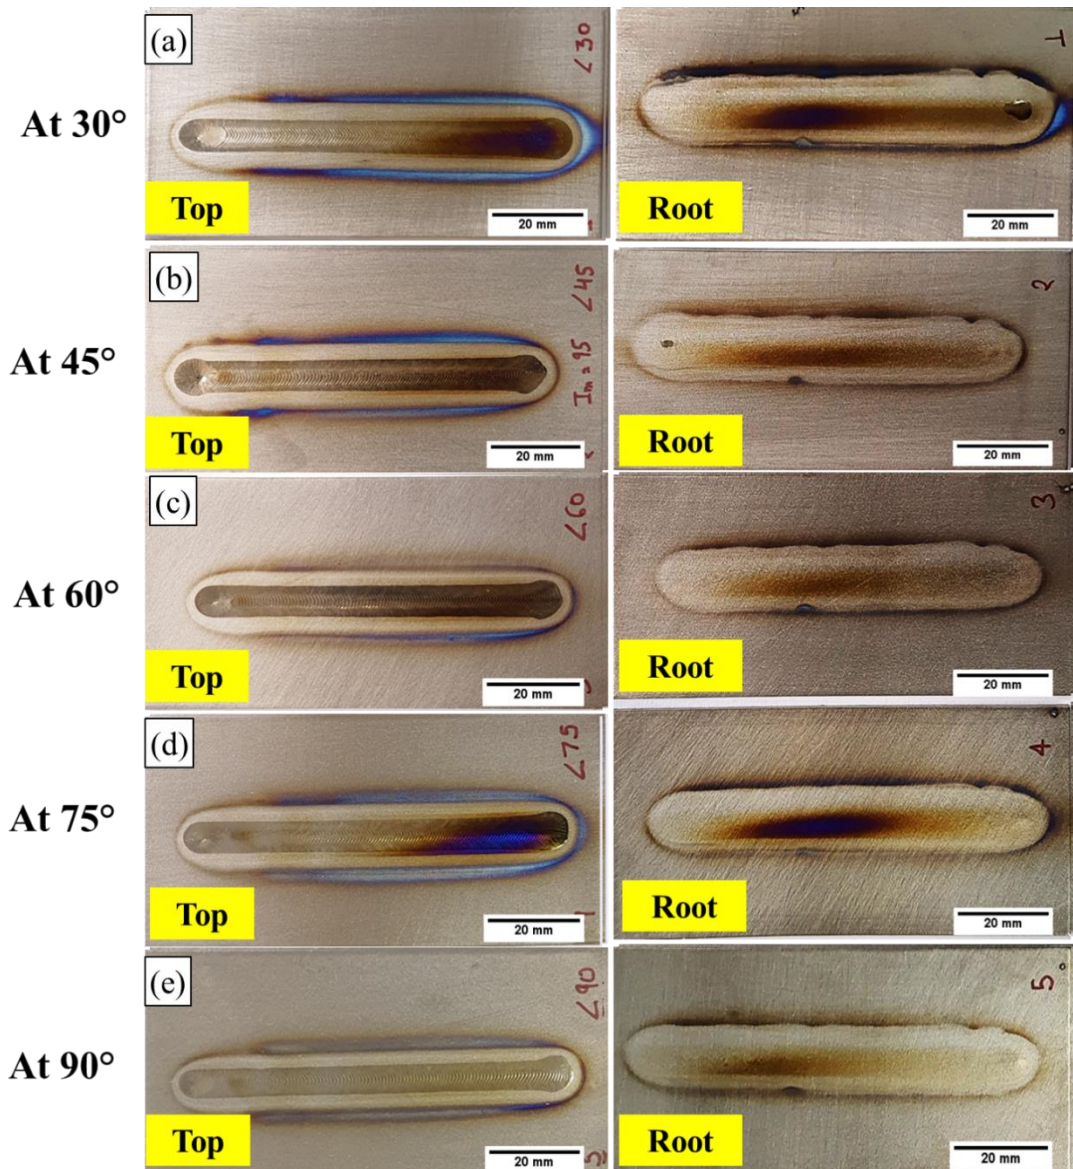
Top and root of the BOP welding on CP-Ti using (a) 30°; (b) 45°; (c) 60°; (d) 75°, and (e) 90° electrode tip angles
